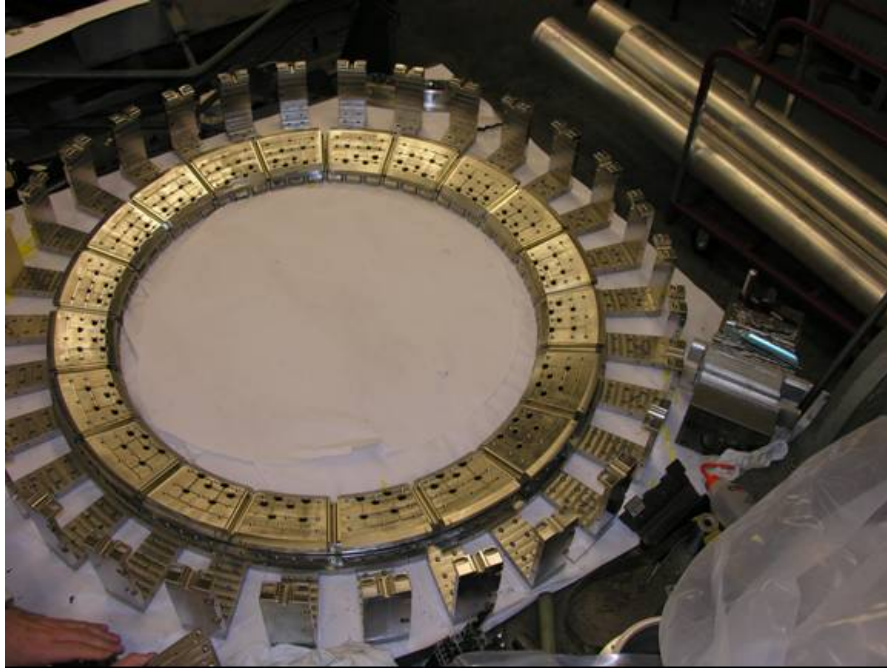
The cryopump test stand will mock up pumping geometry expected in C-Mod. The pump control system, pumping rates, and maximum gas inventory will be tested on the stand before installation on C-Mod.
